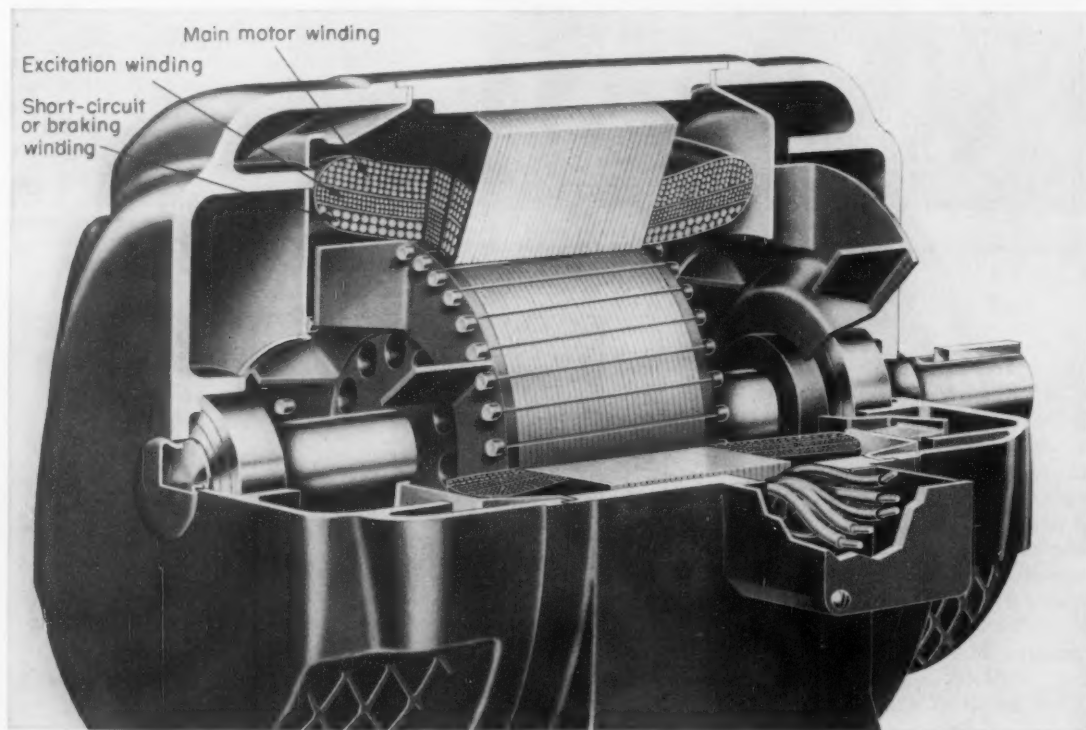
Two separate built-in braking windings offer controlled stopping of this ac squirrel-cage motor. Running
